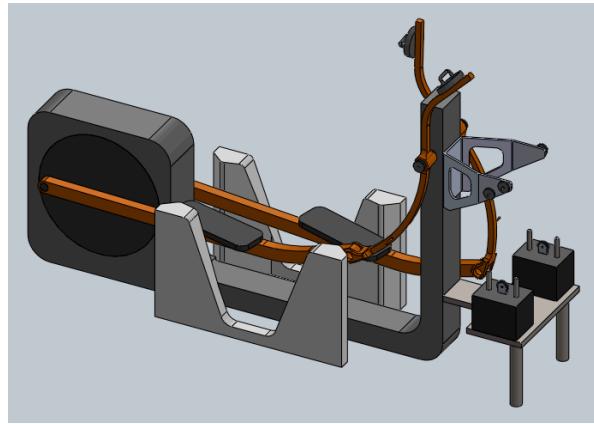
Initial design concept showing a weighted cable and pulley system for rotation at the hand position and a guided foot pad system for rotation at the foot position
